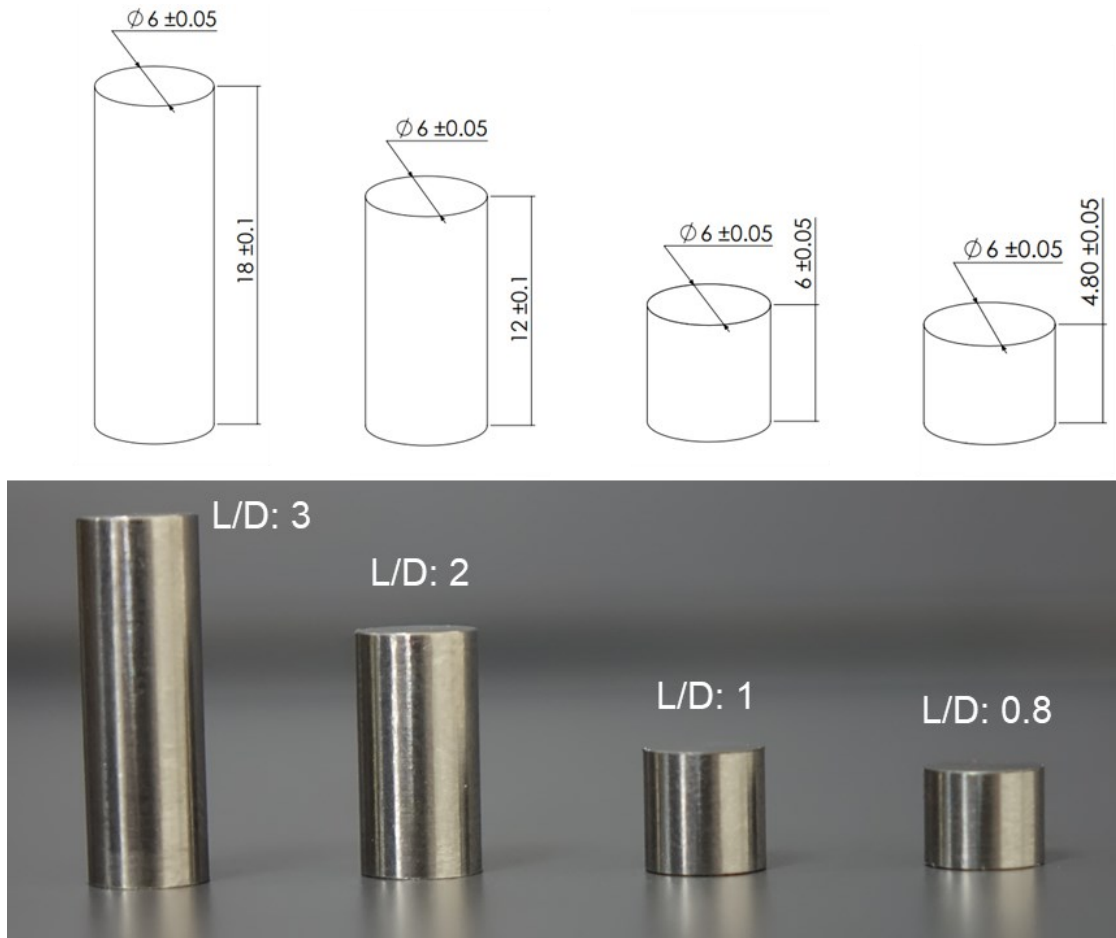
Compression test specimens used in quasi-static and dynamic tests and technical drawings of the specimens.
